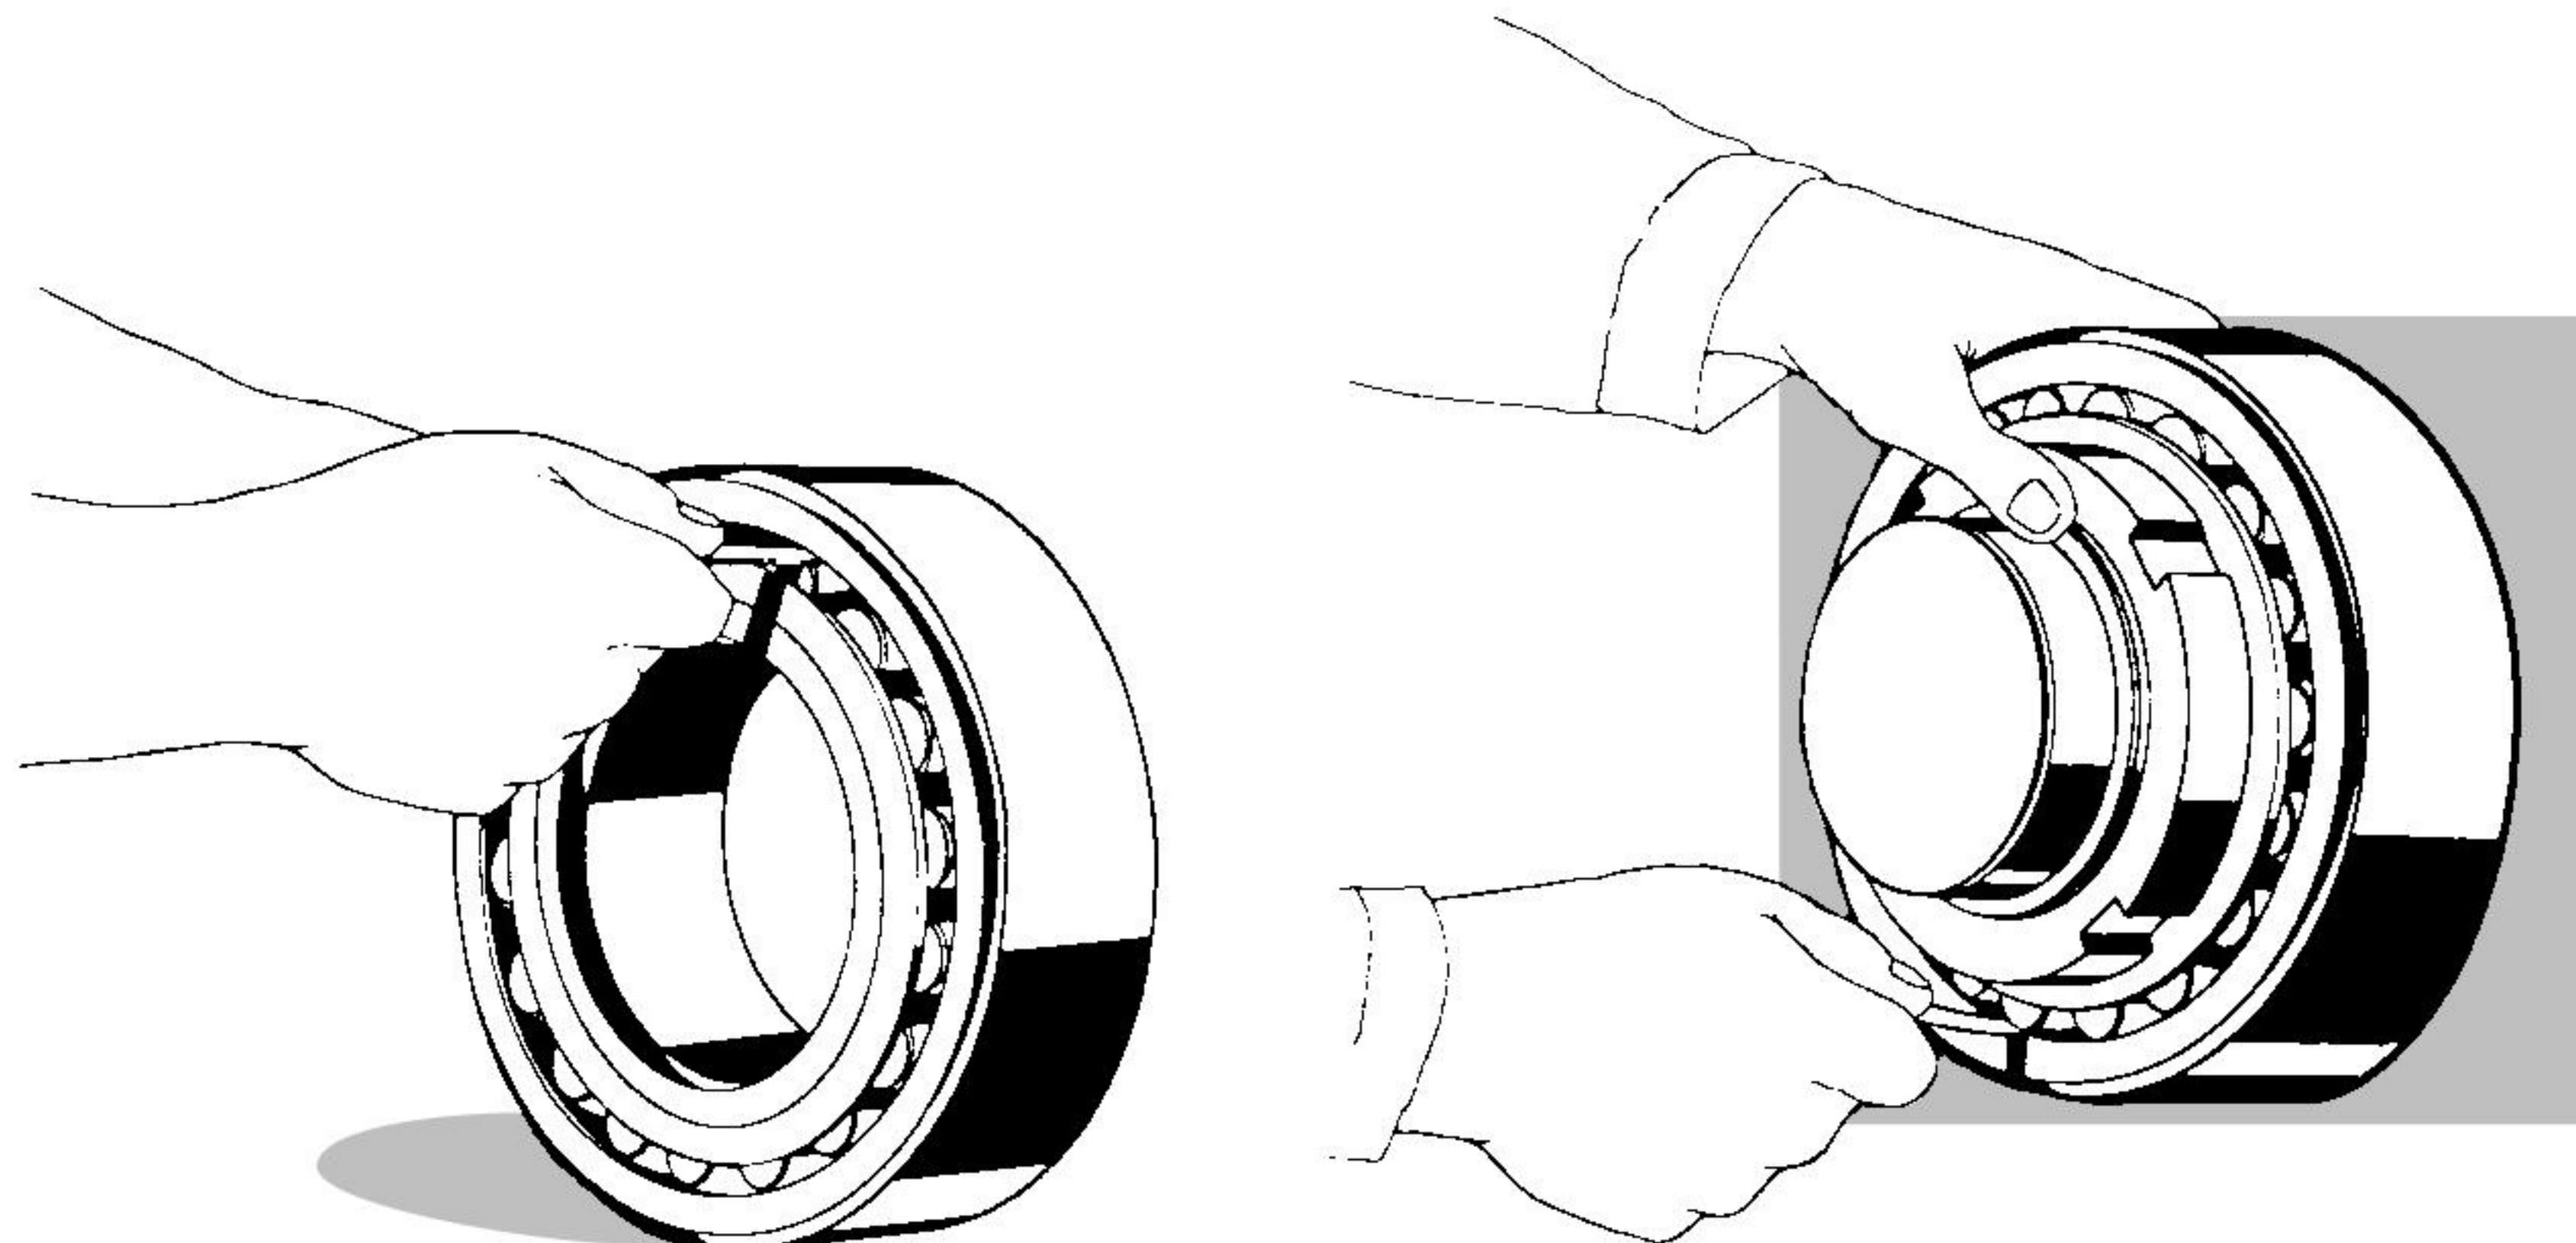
Determining internal bearing clearance for a spherical roller bearing.
